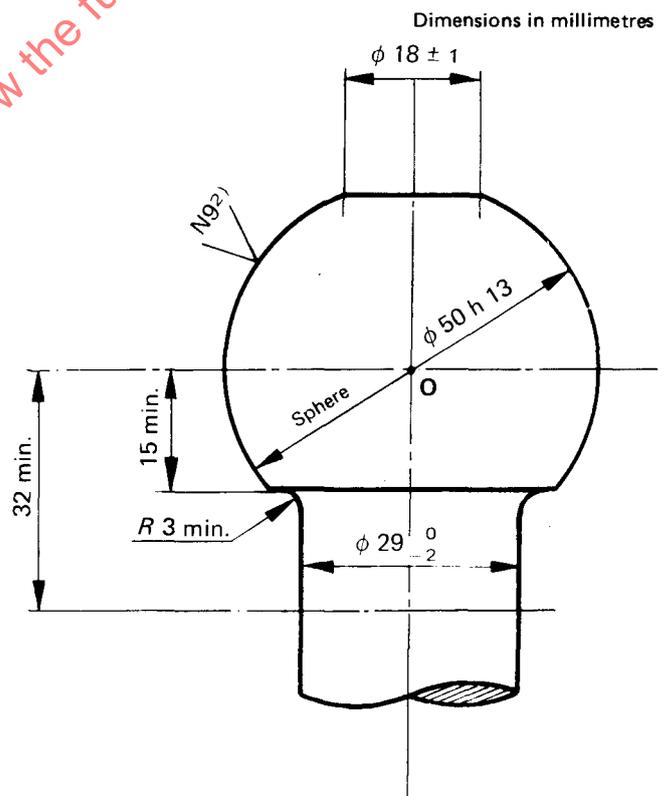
Dimensions and tolerances of the coupling ball
